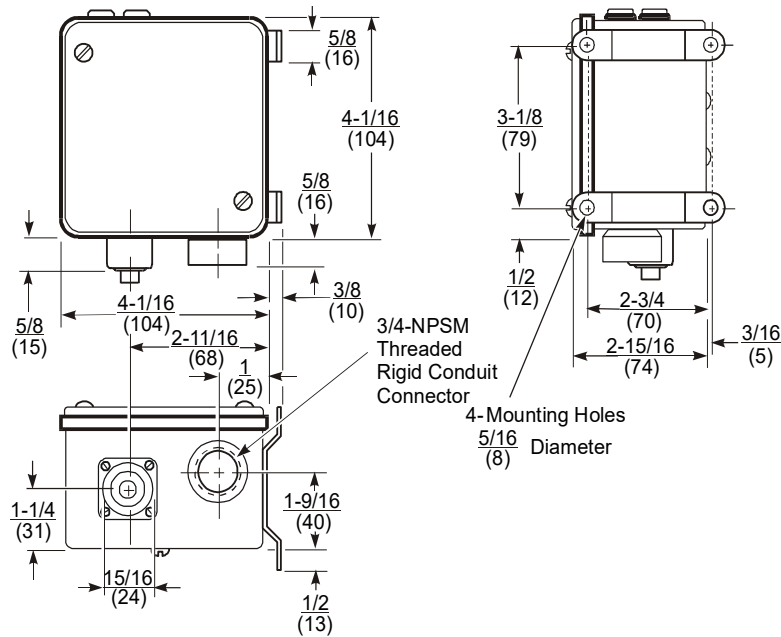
Dimensions for High Pressure Controls with NEMA 3R Enclosure, in. (mm)
